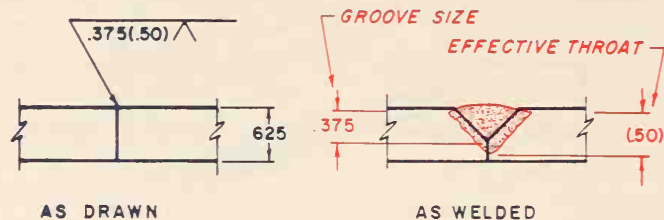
Example of effective throat-weld larger than groove
